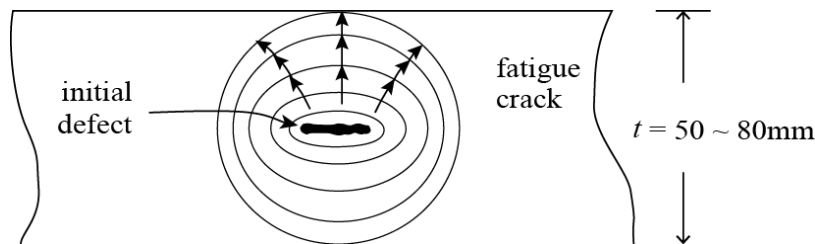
Fatigue crack growth from an internal defect in extremely thick welded joint.
